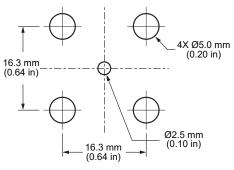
Recommended PCB Footprint for the CONN013-W Connector
